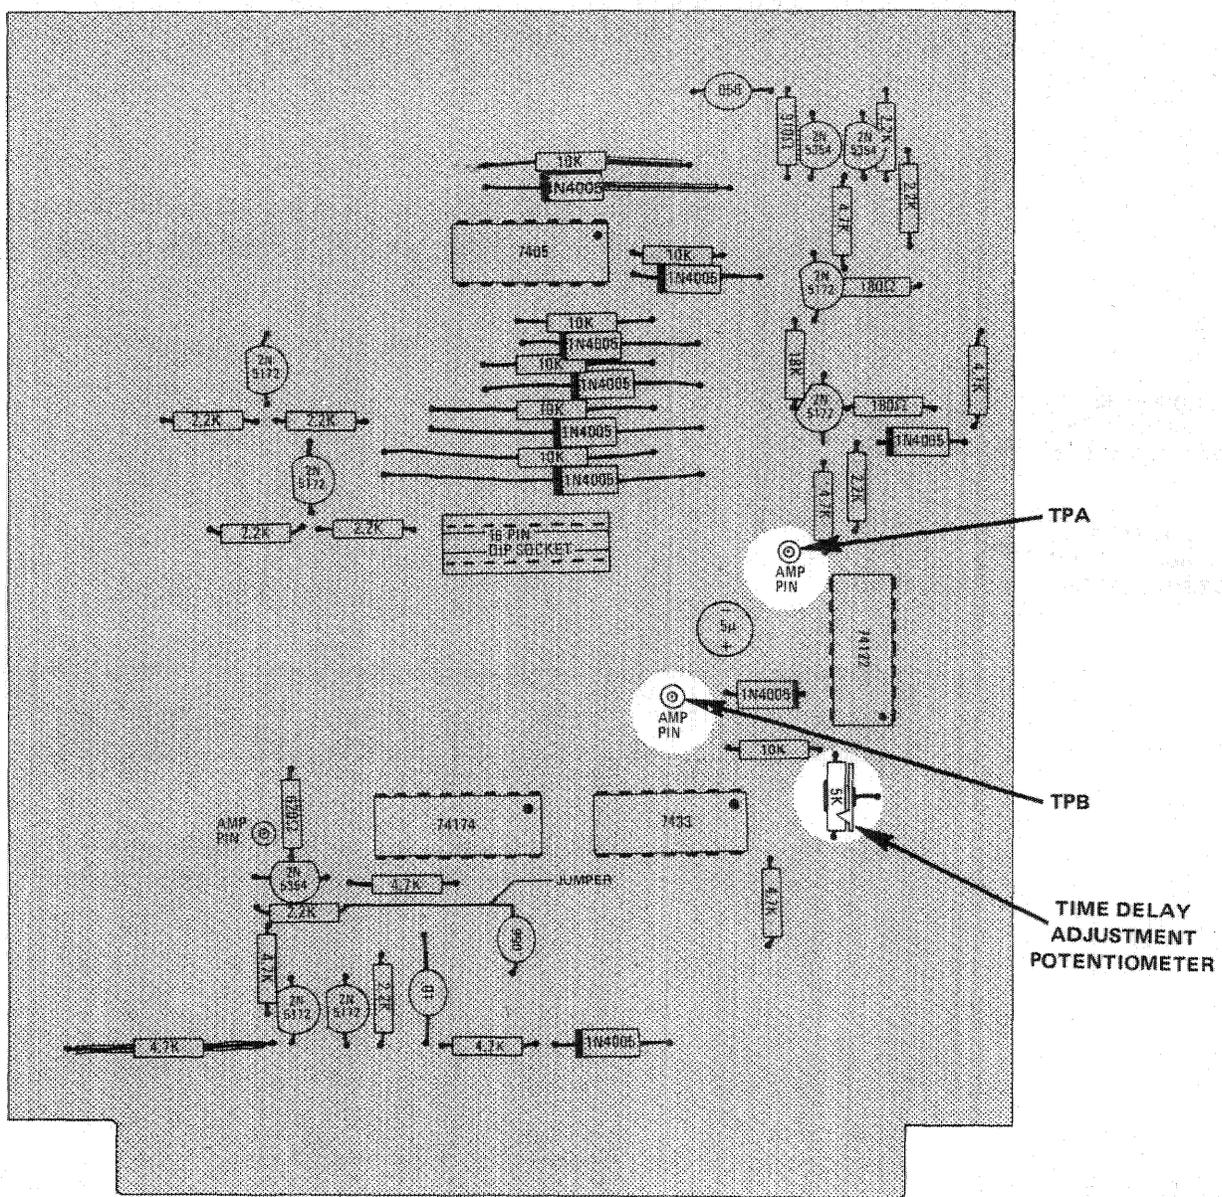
Card Assembly No. 10, Test Point and Adjustment Locations
